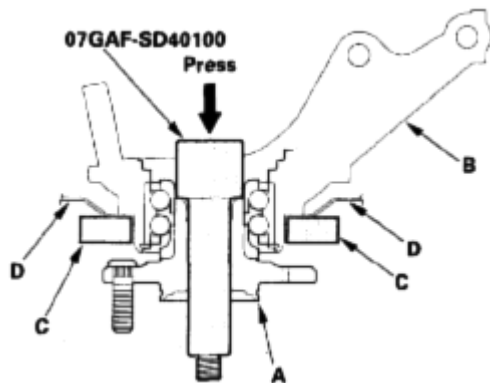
Separating Hub From Knuckle Using Hub Dis/Assembly Tool And Hydraulic Press
